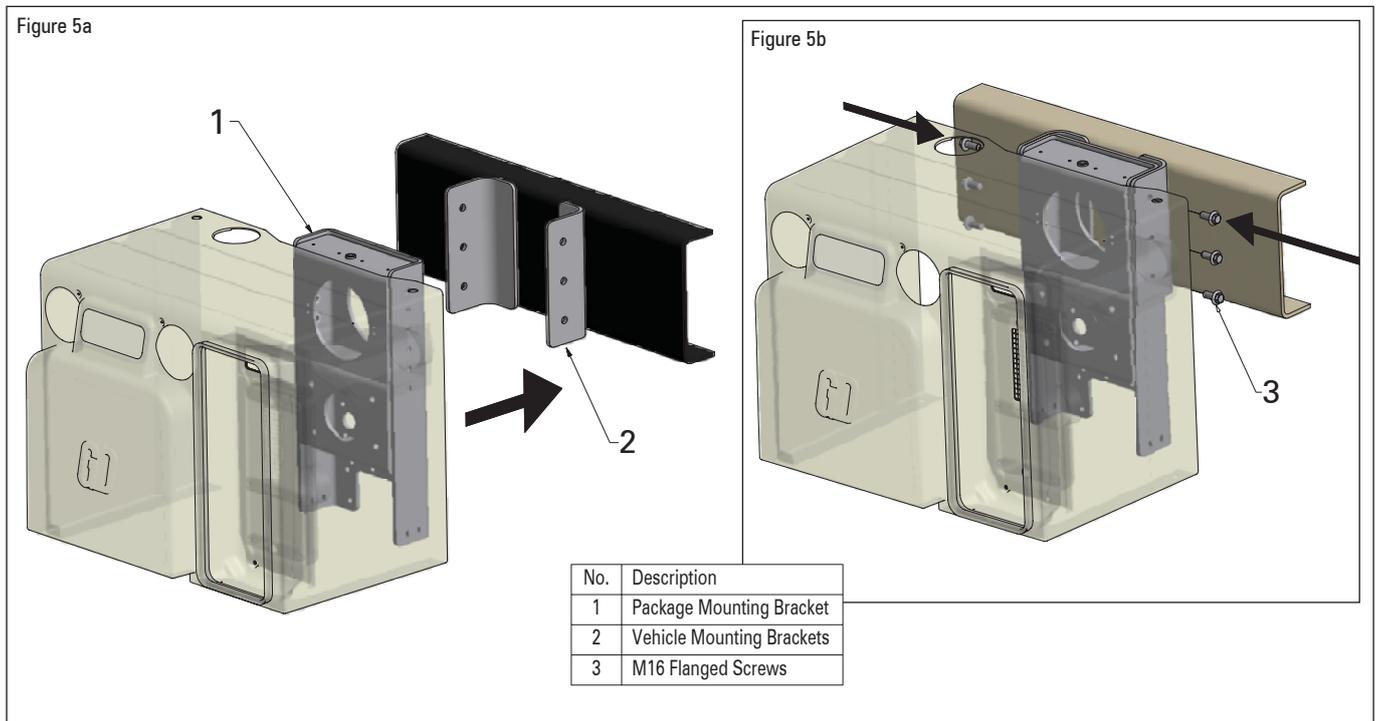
Installation of Bulkline 650/1000 LNC Package to the Vehicle Mounting Bracket/Chassis
